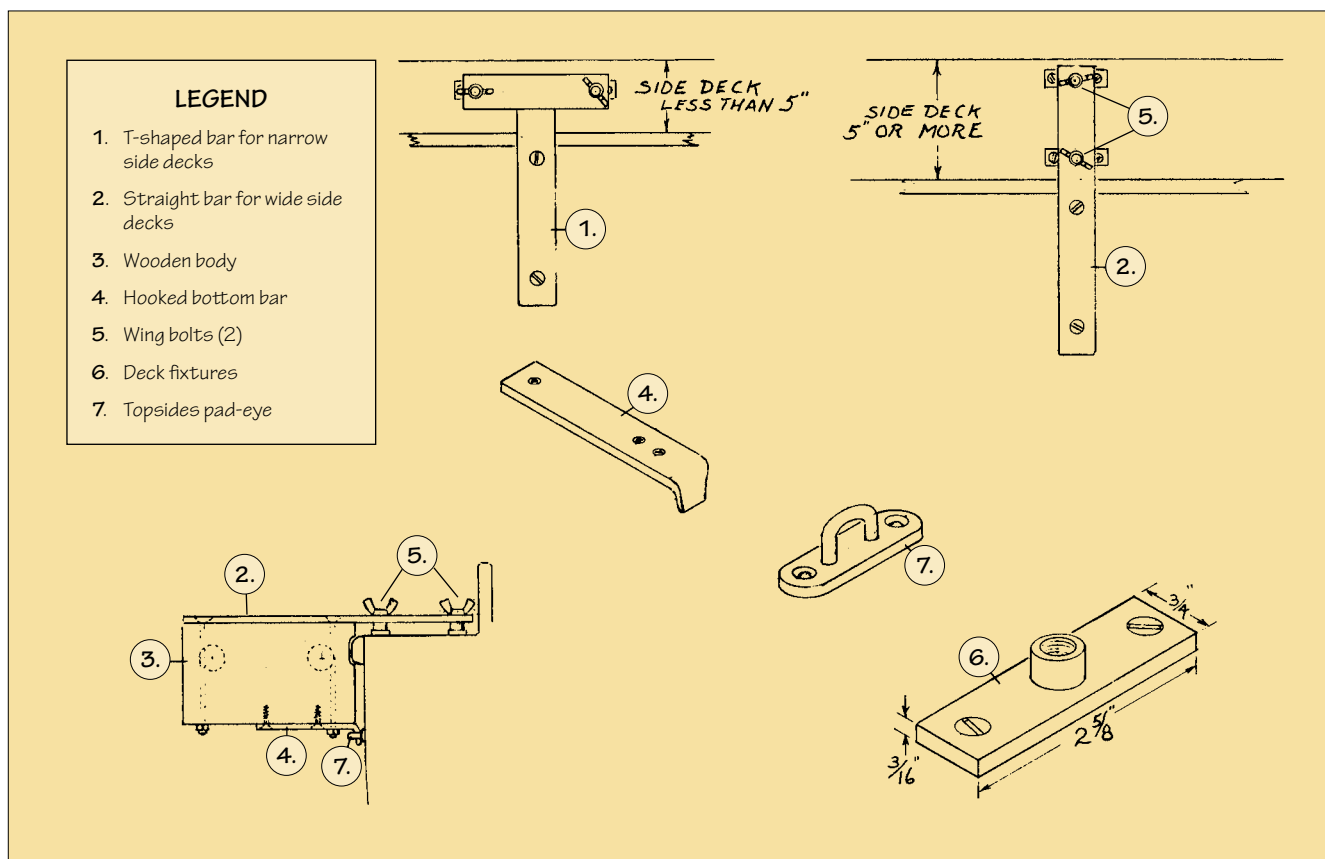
The simple components of the side-mount bracket are made from commonly available materials: metal flat-bar, wood, threaded nuts and wing nuts, and threaded rod. Fastenings are wood screws and machine screws. Silver-soldering or welding can be used to join metal components where necessary.
